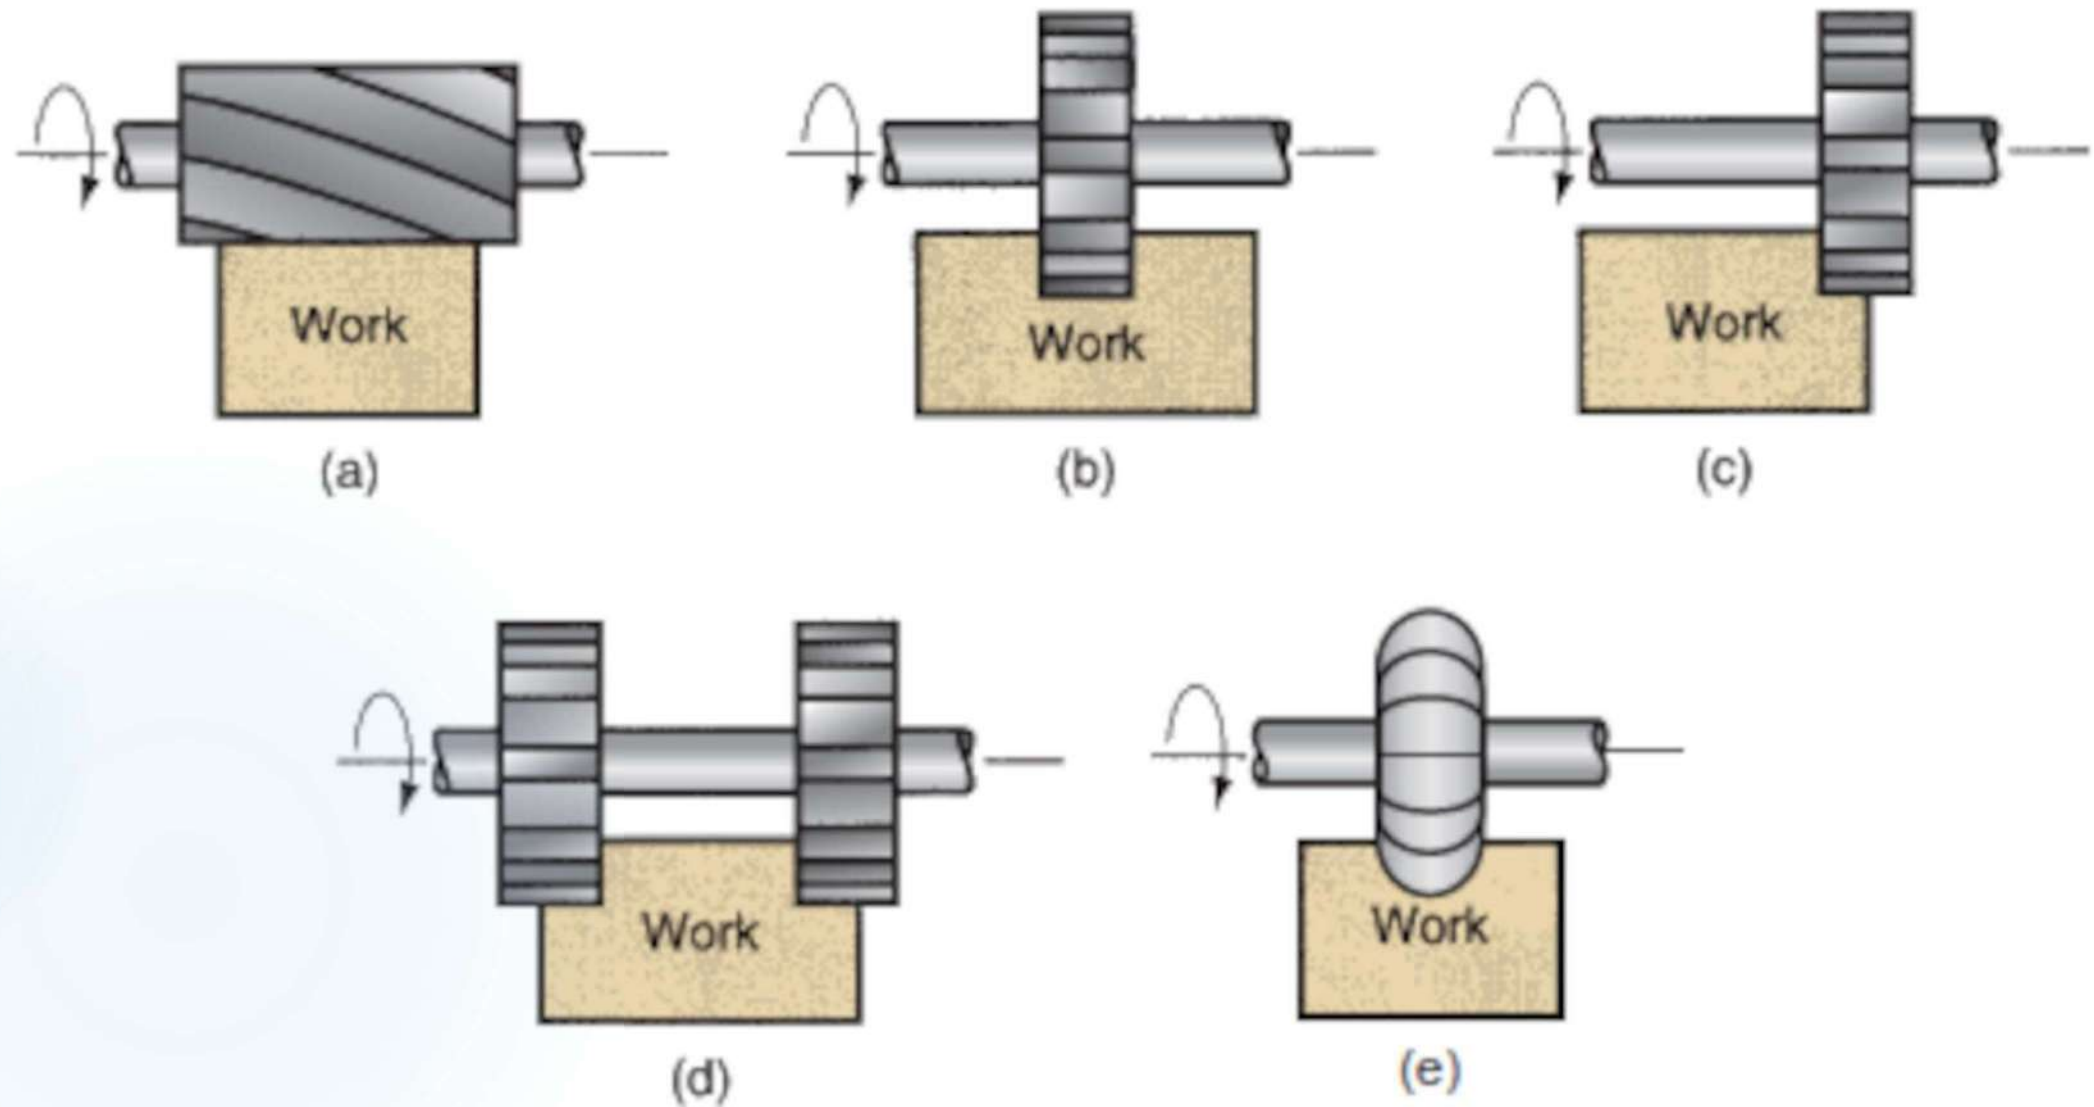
Peripheral milling: (a) slab milling, (b) slotting, (c) side milling, (d) straddle milling, and (e) form milling.
